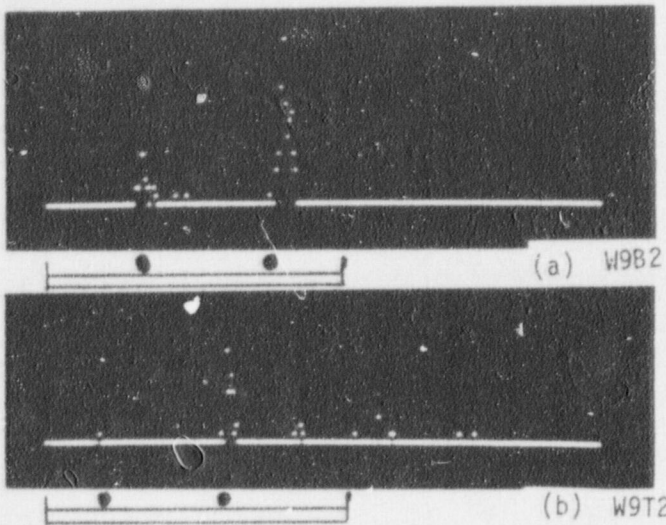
DETECTION OF 1.0" SLAG INCLUSIONS DURING SUBMERGED ARC WELDING OF A533B STEEL
